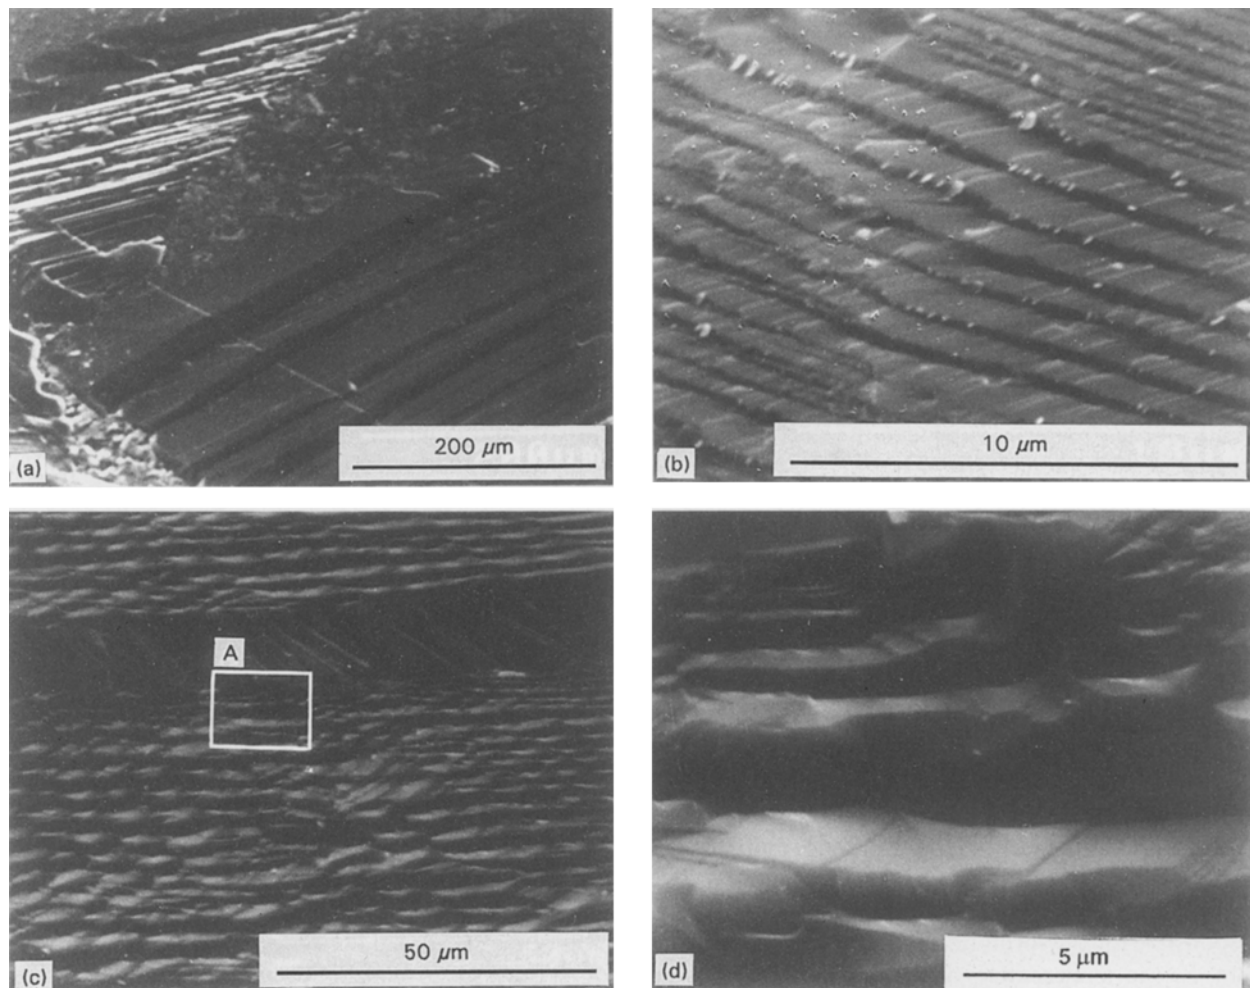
RBSiC joint fracture surface showing {111} cleavage facets making a small angle with the ceramic surface: (a) 1000 °C–30 min–0.4 °C min⁻¹; (b) 1000 °C–30 min–NCR–4.5 μm Al evaporated braze film; (c) 1000 °C–90 min–NCR; and (d) detail of the zone A on (c).
